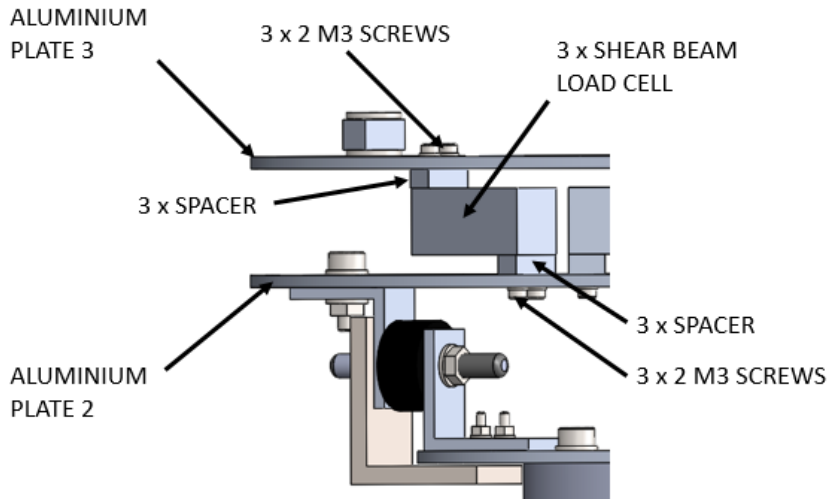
Shear beam load cells' mounting between plate 2 and plate 3
